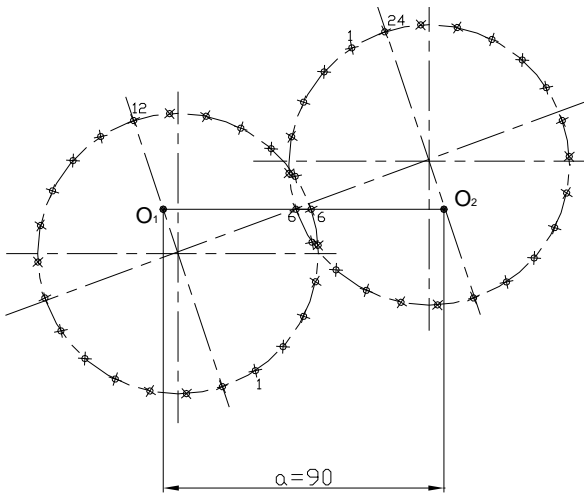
Incorrect engagement when choosing a circular gear with eccentric centers of rotation
